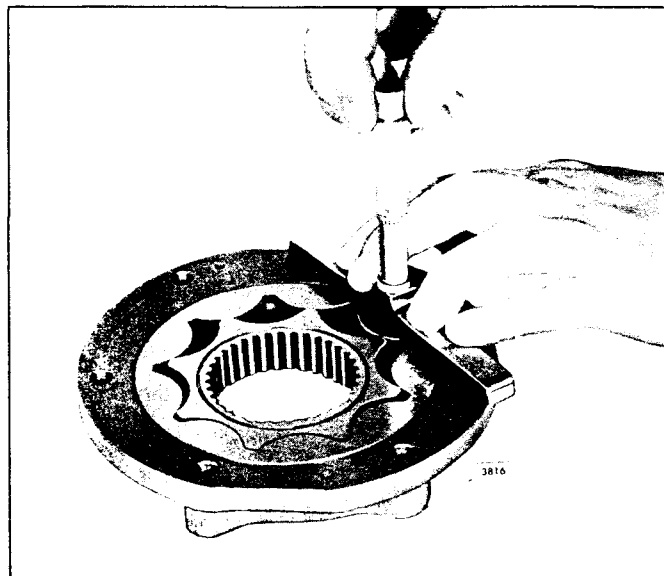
Measuring Clearance from Face of Pump Body to Side of Rotor
